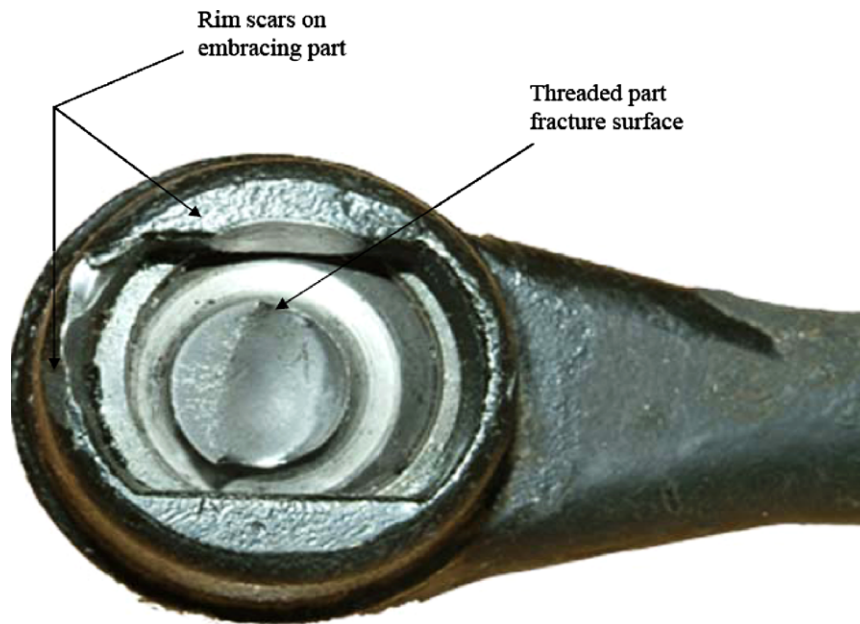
Threaded part fracture surface and rim scars on embracing part.
